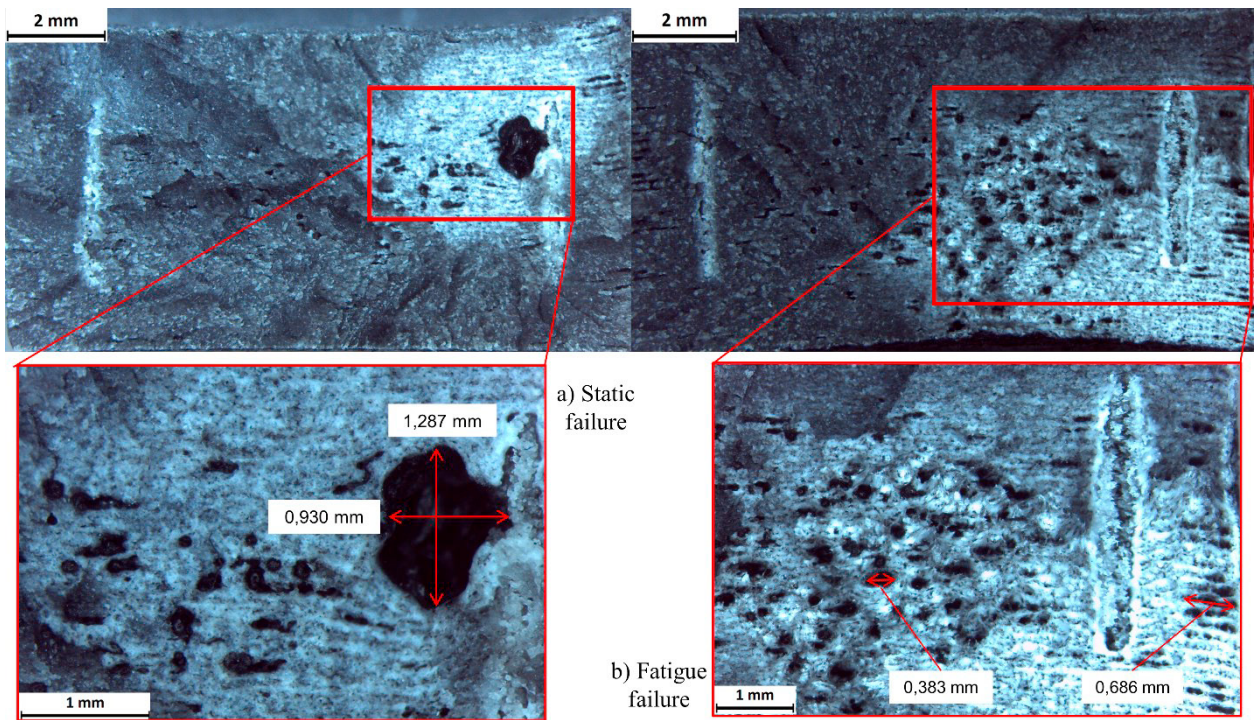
Fracture surfaces for: a) static tensile tests; b) fatigue tests
